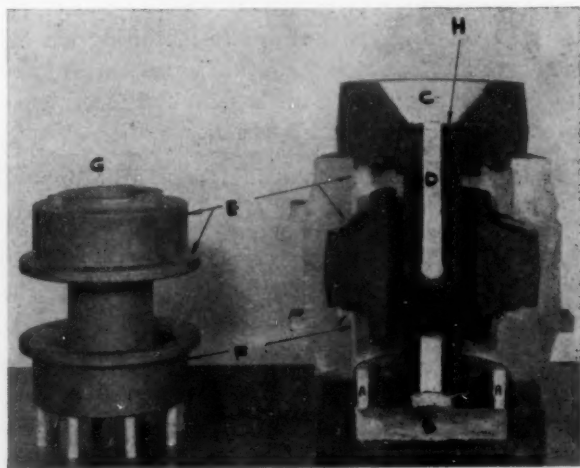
SHOWING CASTING AND MOLD SET-UP OF A TRACK CARRIER ROLLER. (A) PENCIL GATES (B) BOTTOM POURING BASIN. (C) TOP POURING BASIN. (D) SPRUE. (E)-(F) TREAD FACE EXPOSED TO CHILL. (G) FINISHED CASTING.
